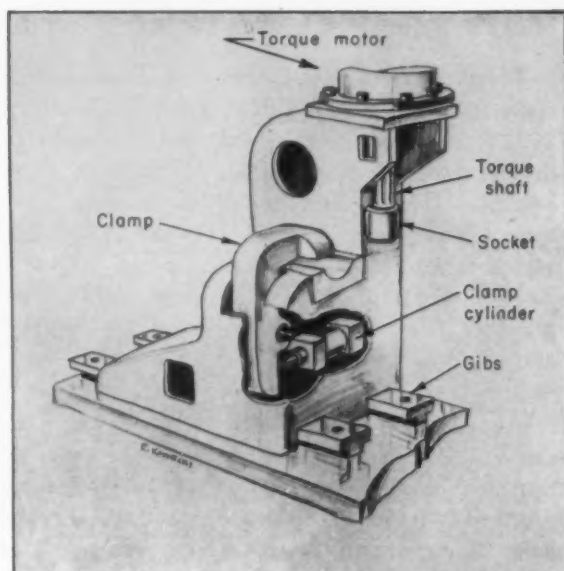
Cutaway view of left head showing operation of clamp. Torque motor, shaft and socket are used to correctly stretch the left assembly bolt.
